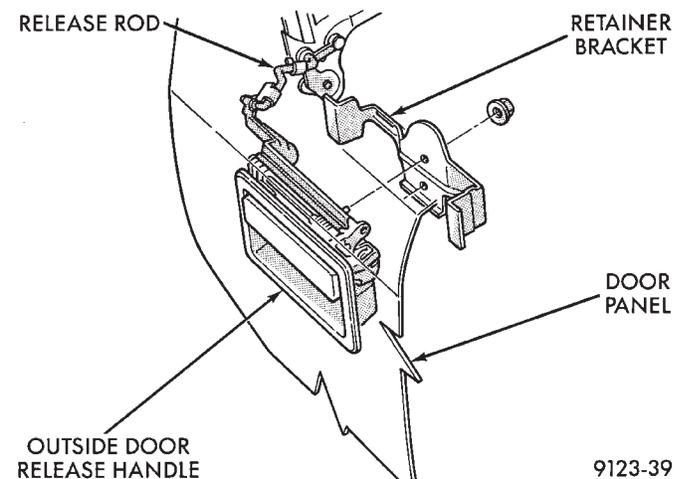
Outside Rear Door Latch Release Handle—Typical
